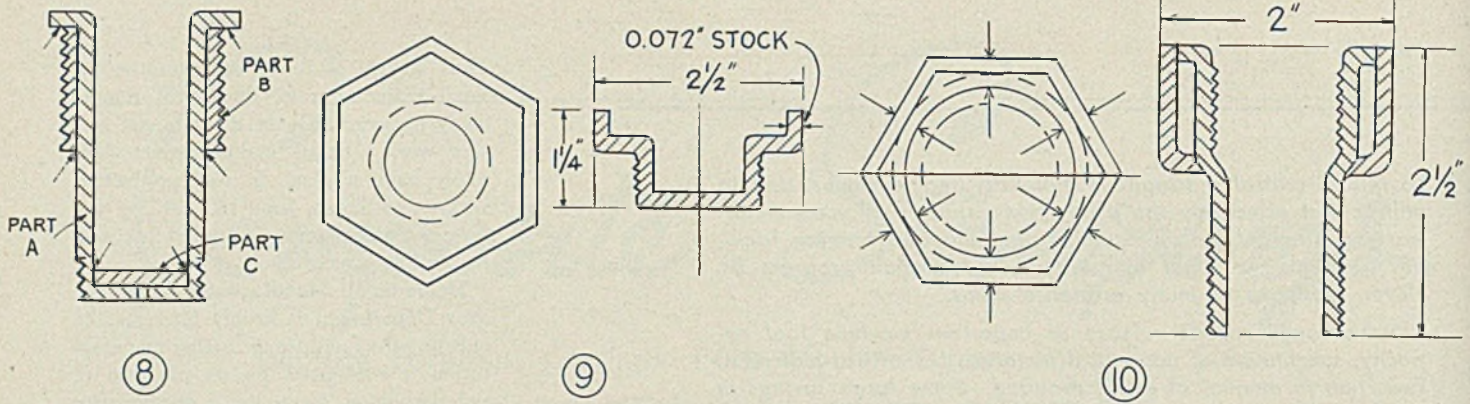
Originally made from solid cold-drawn bar stock, this booster adapter now is made from three pieces of sheet steel, a much less critical material. Saving more than 2 pounds per unit, this change will save 210,000 machine tool hours and enough steel for 3060 1-ton bombs on only 1,500,000 adapters. And 25 screw machines will be released for more critical work
